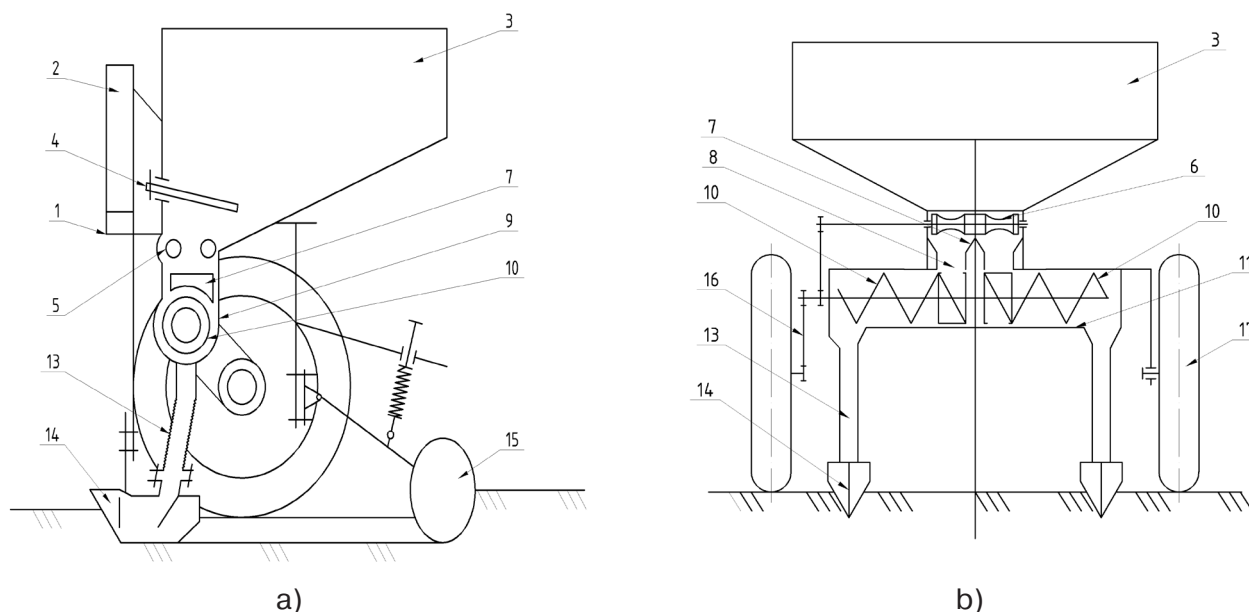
Scheme of the potato planter: a) – side view; b) – a view of AA
